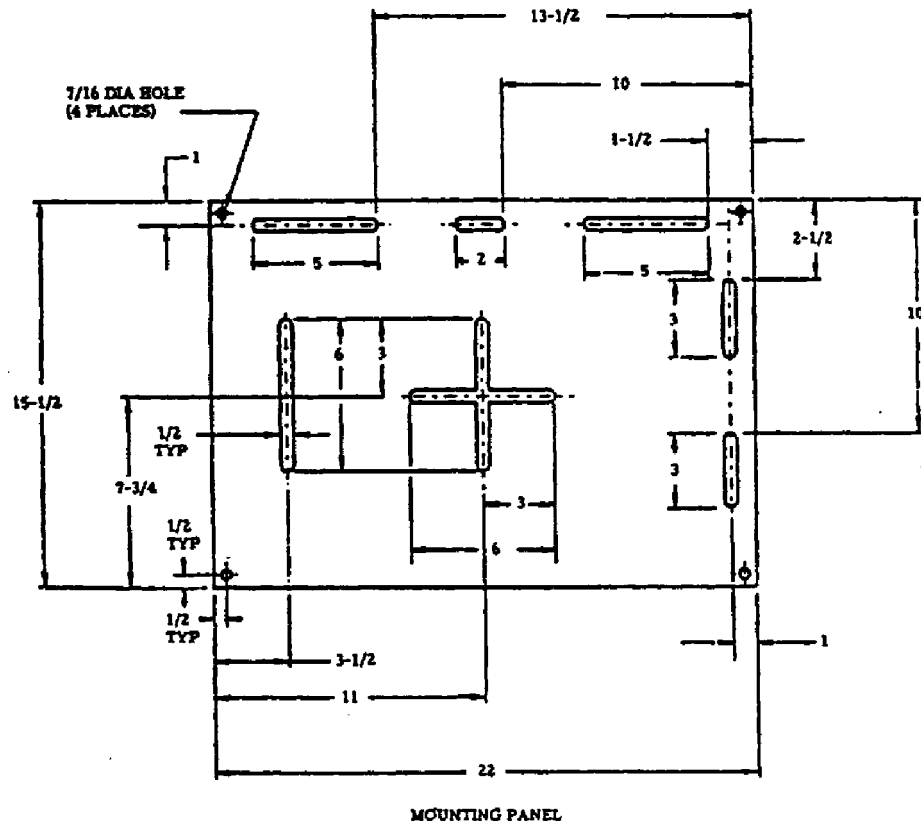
Automatic Combustion Control Calibration Panel Drawing (Sheet 7 of 13)
